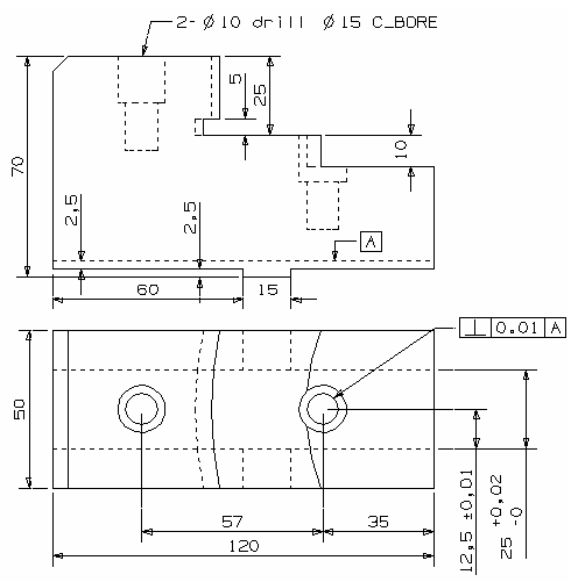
Dimensions and tolerances of the chuck jaw.
